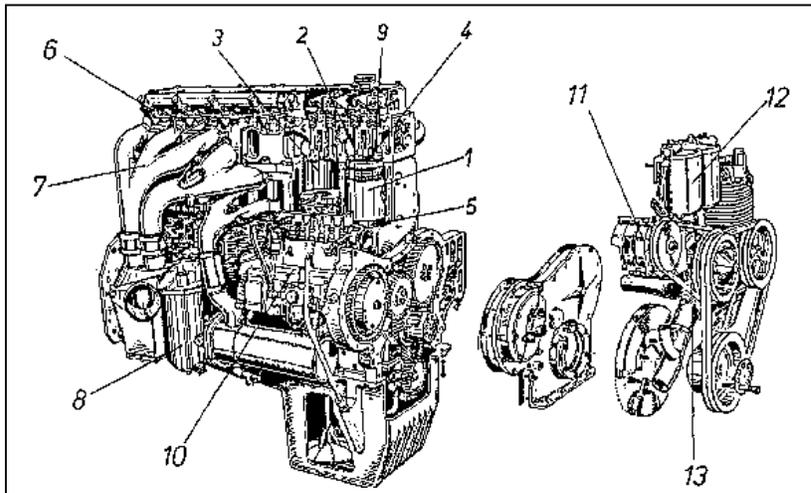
6-cylinder diesel engine, partly opened (MAN).
